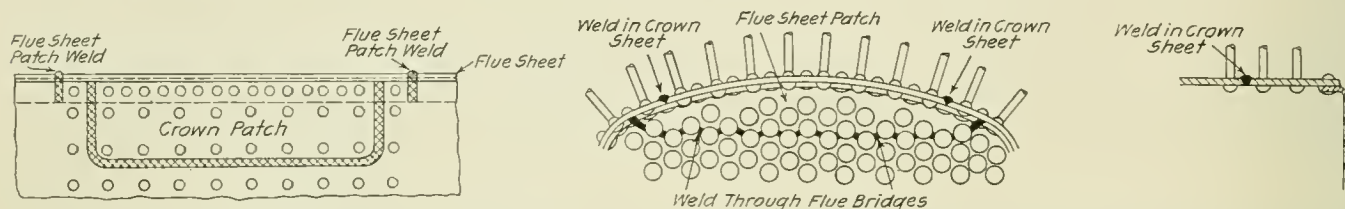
Crown and Tube Sheet Patch Made by Oxy-Acetylene Welding Process
